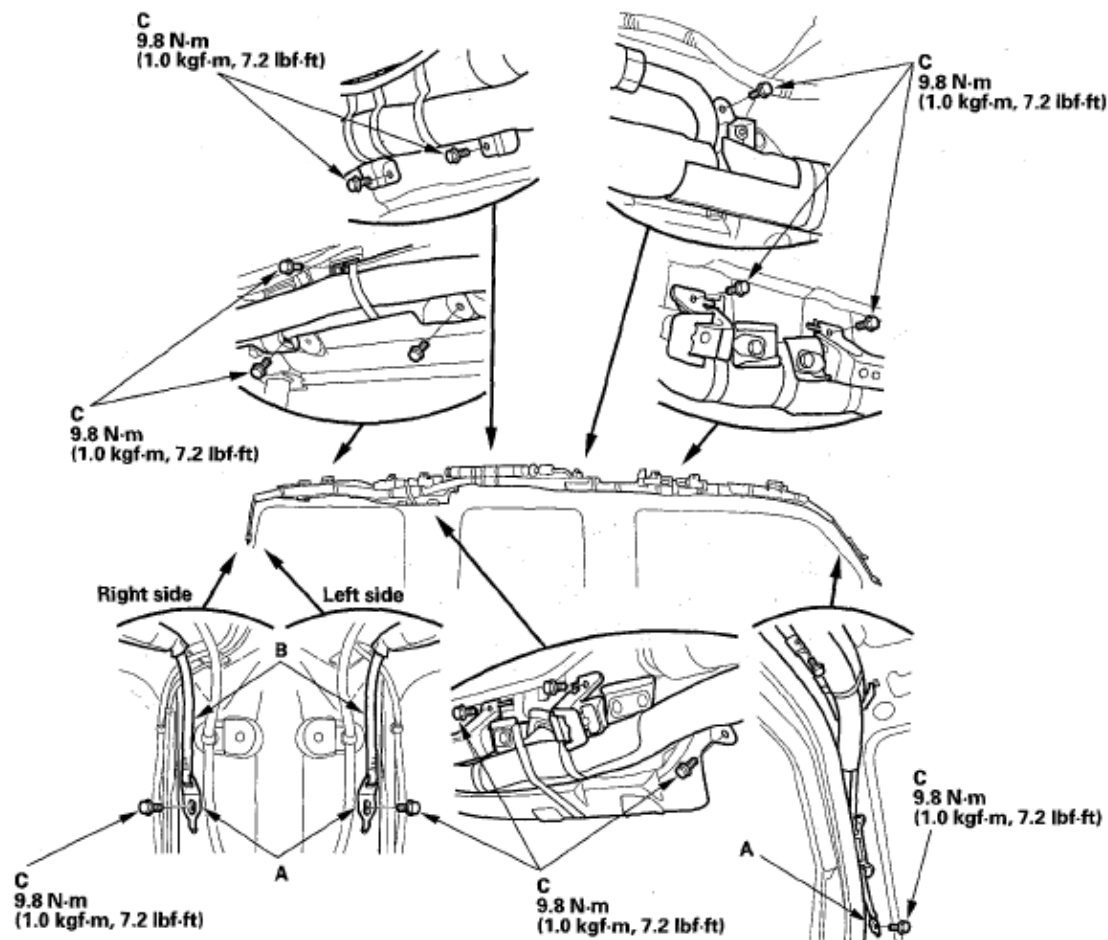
Identifying Side Curtain Airbag Mounting Bolts
